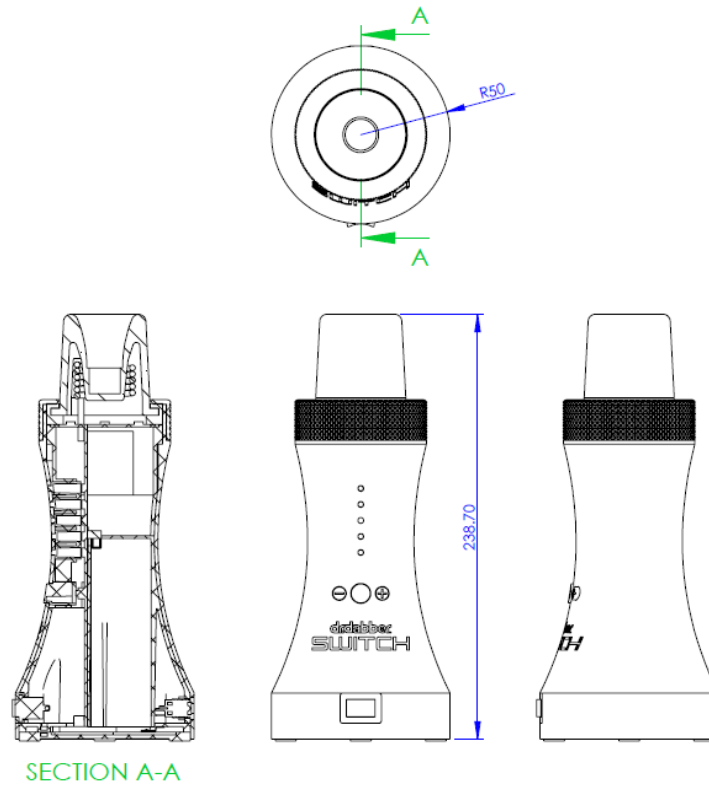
Diagram and dimensions of the SWITCH - Main Unit. All dimensions are in mm.
